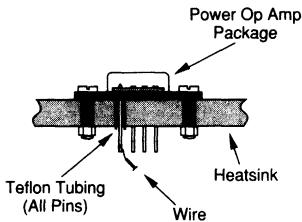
MOUNTING TECHNIQUES (CROSS SECTION VIEWS)
